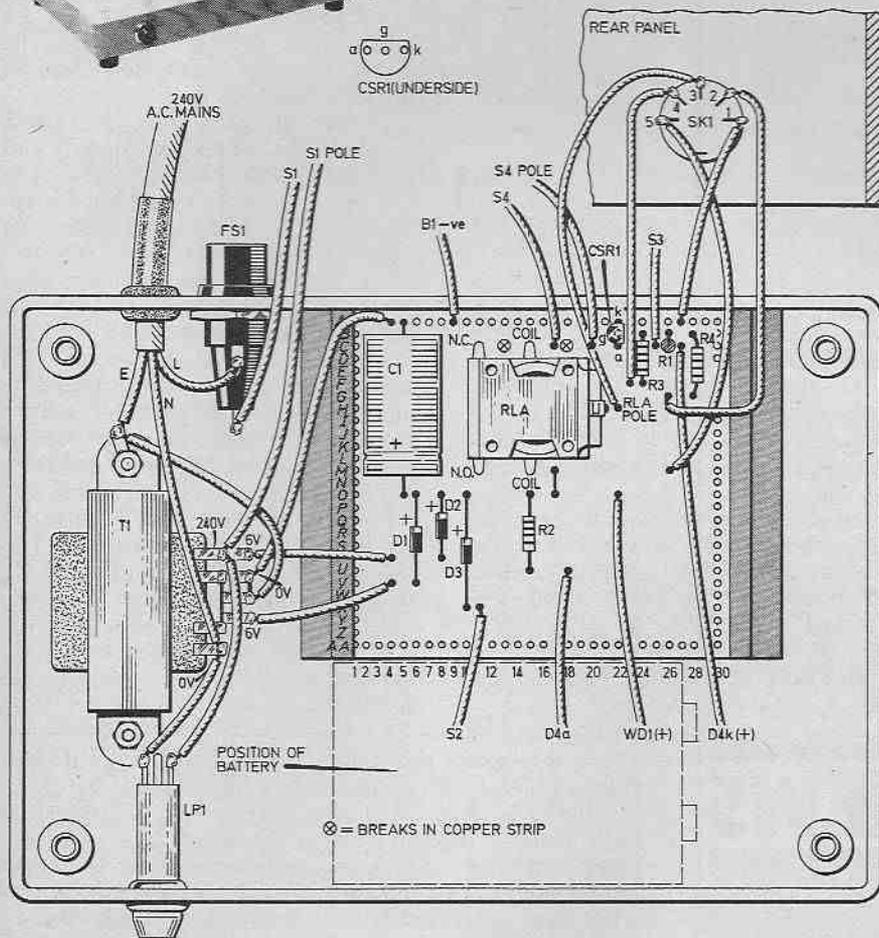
Layout of the components on the stripboard and wiring-up details. Below shows positions of top-panel controls and wiring information. Note that the copper strip on the board underside is to be broken at two points, C13 and C18.
